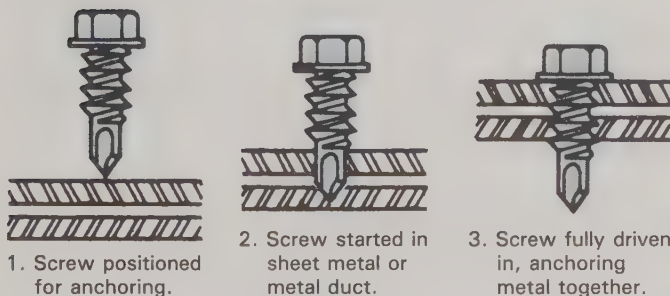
Self-drilling sheet metal screws require no pilot hole.
